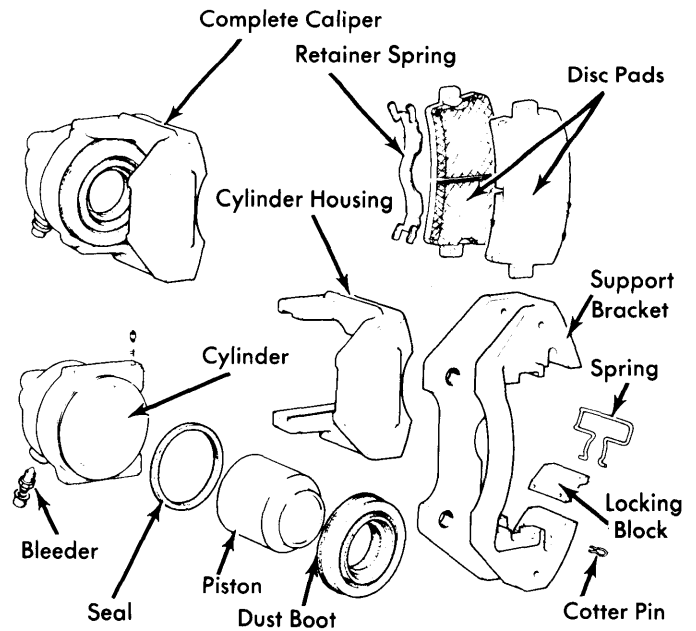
Front Brake Caliper Assembly Exploded View (X1/9 Models)
